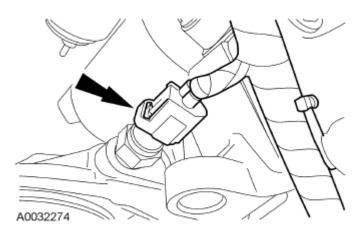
Locating Engine Oil Pressure Switch Electrical Connector Courtesy of FORD MOTOR CO.
